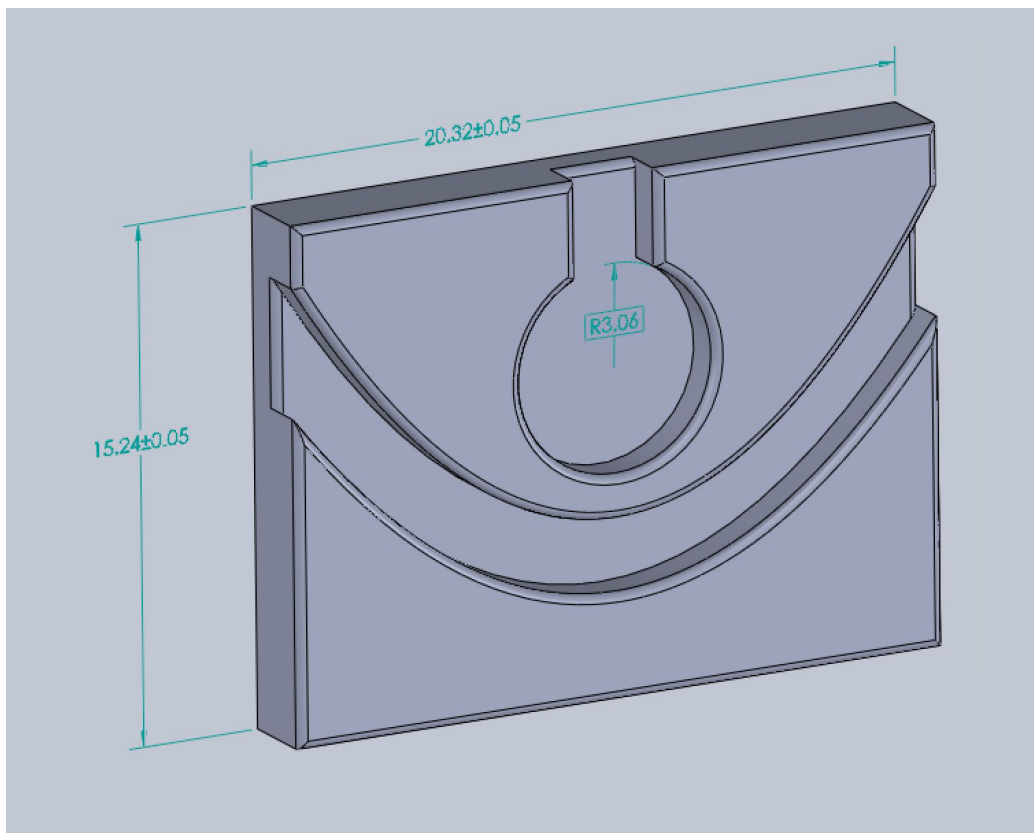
CAD drawing of the base design with dimensions in centimeters. For a more complete set of dimensions, see the drawing in Appendix C.
